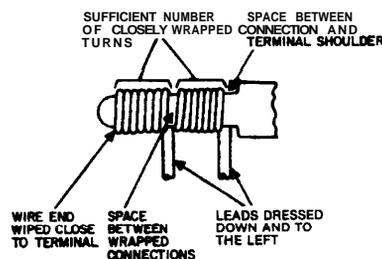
Example of Visually Acceptable Solderless-Wrapped Connections.
